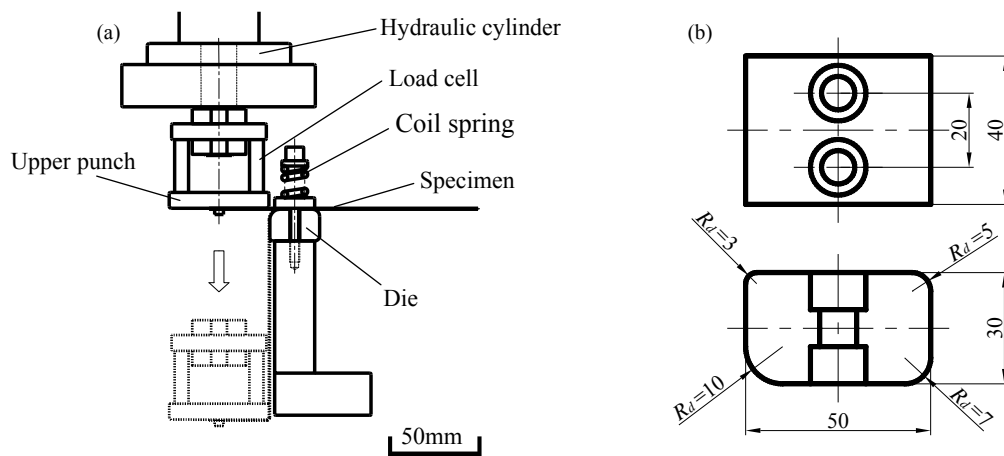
(a) Experimental apparatus and (b) cross-sectional view of die
